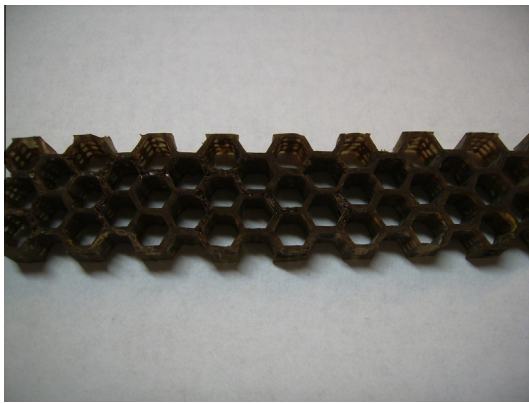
Honeycomb core manufactured using the mold with the fixed inserts.
